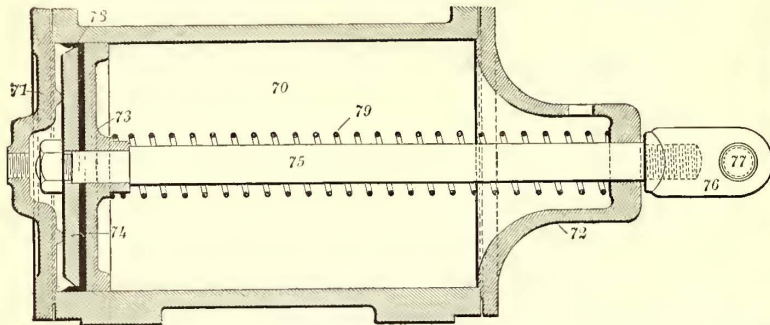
LONGITUDINAL SECTION OF BRAKE CYLINDER—GENETT SYSTEM.
